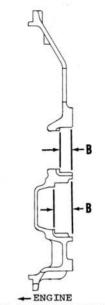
Measure (B) between bottom of front bearing race bores and mounting flange mating surface to determine shim thickness as outlined in text.
